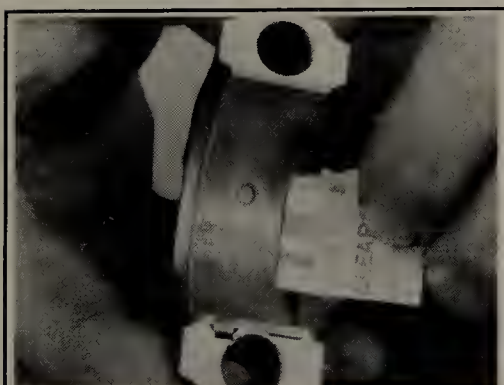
After the cap is removed again, use the scale supplied with the gauging material to check the clearance
